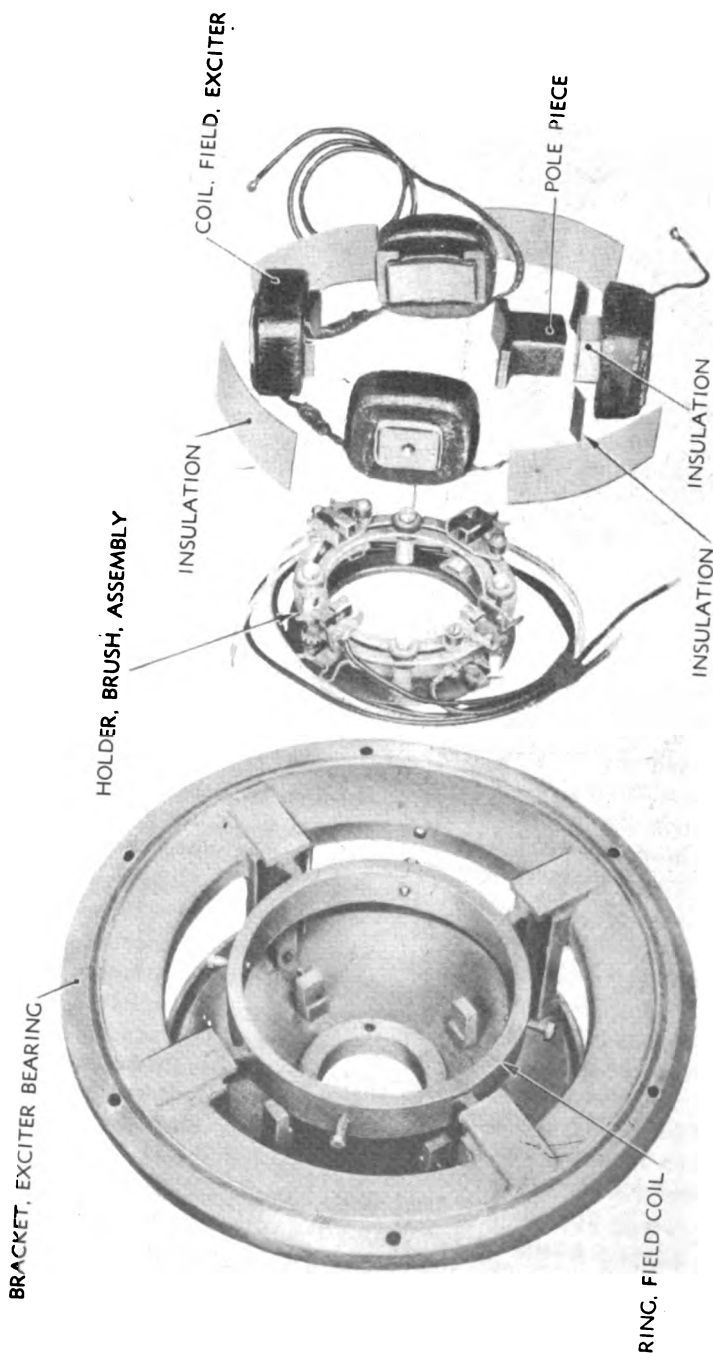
Exciter Bearing Bracket Removal — H. B. Co. Unit
